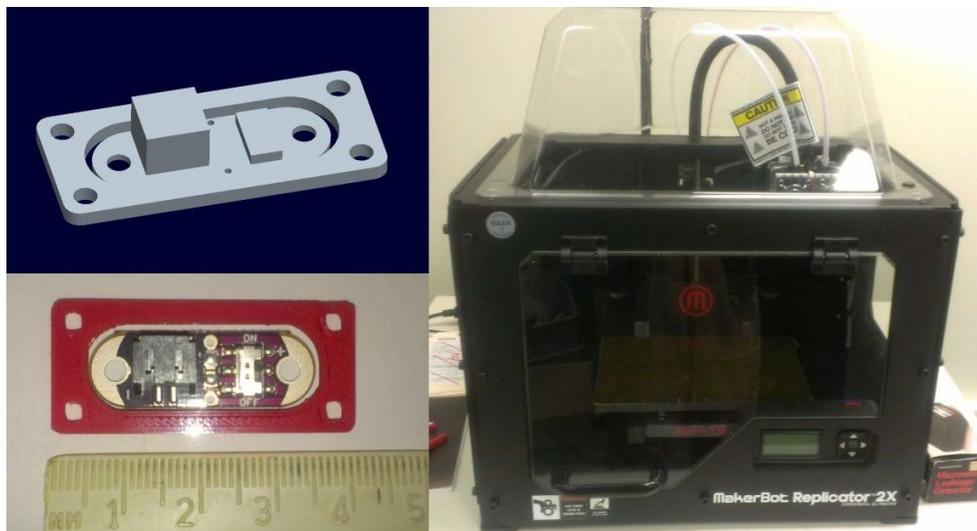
Top left: Solid model of a brace and board. Bottom left: 3D printed brace. Right: MakerBot Replicator 2X 3D Printer.
